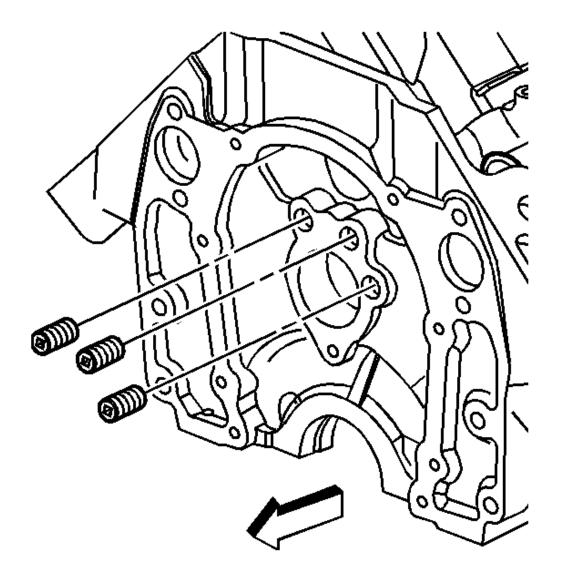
View Of Front Oil Gallery Plugs Courtesy of GENERAL MOTORS CORP.
